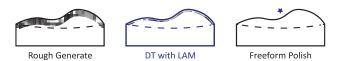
Process chain including laser assisted machining for the manufacture of freeform optics.
